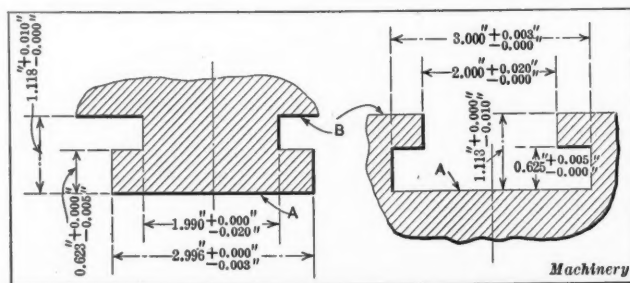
Proper Dimensioning of Slide shown in Fig. 8
